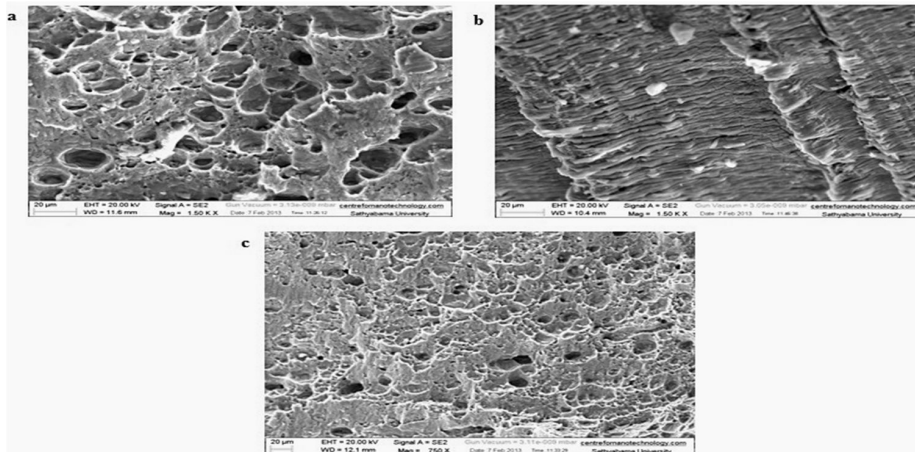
SEM fractographs from the weld cross section at SZ (a) TCT tool with 900 rpm & 100 mm/min (b) TST tool with 900 rpm & 110 mm/min (c) SS tool with 800 rpm & 90 mm/min
